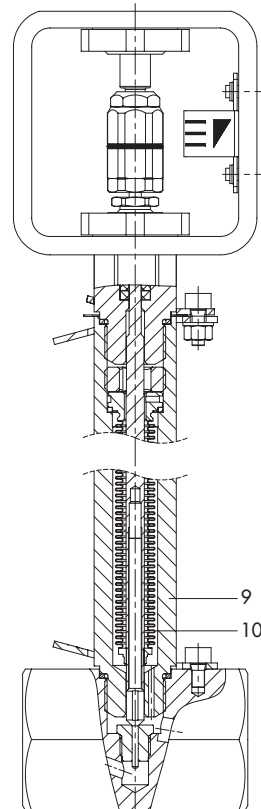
· Type 3510 Valve, globe valve with metal bellows seal
